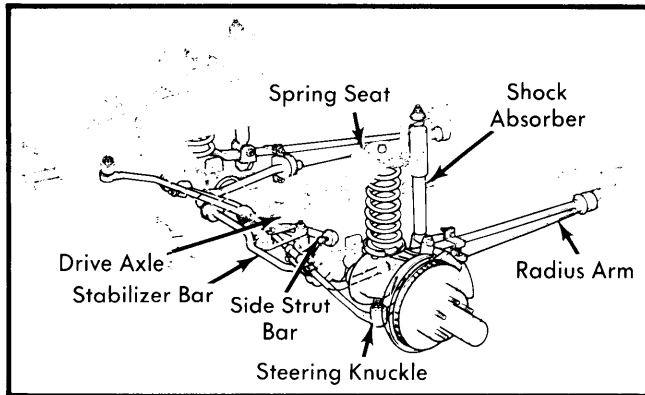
Identification of Front Suspension Components F-150 and U-150 (Bronco)
